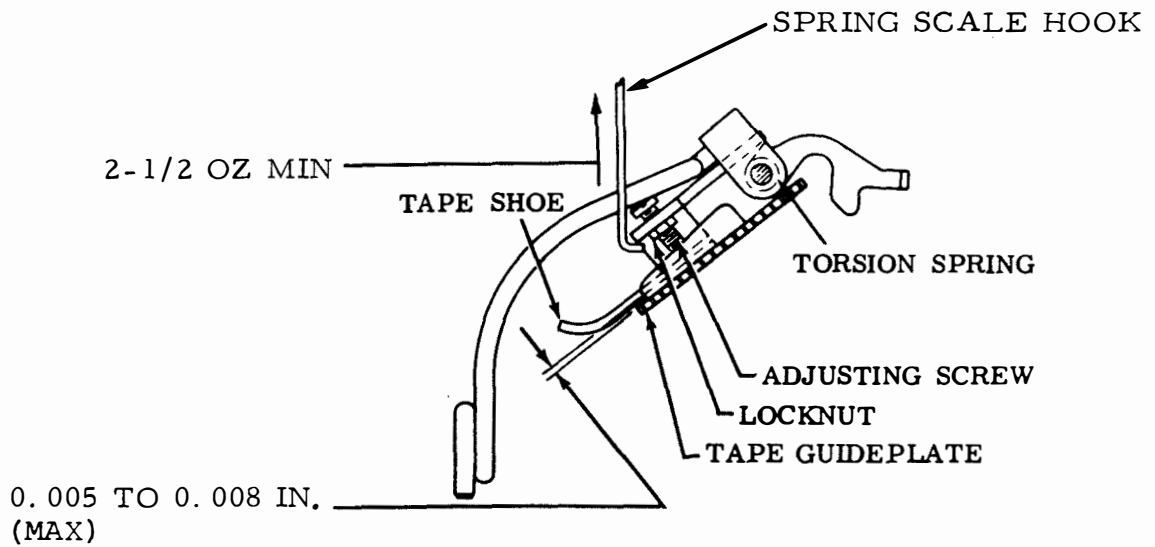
Torsion Spring and Tape Shoe, Rear View
